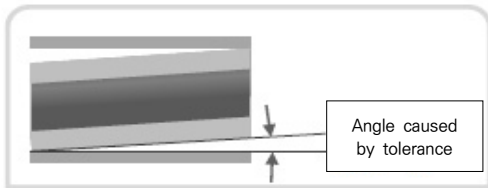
Slack of barrel due to tolerance of assembly
